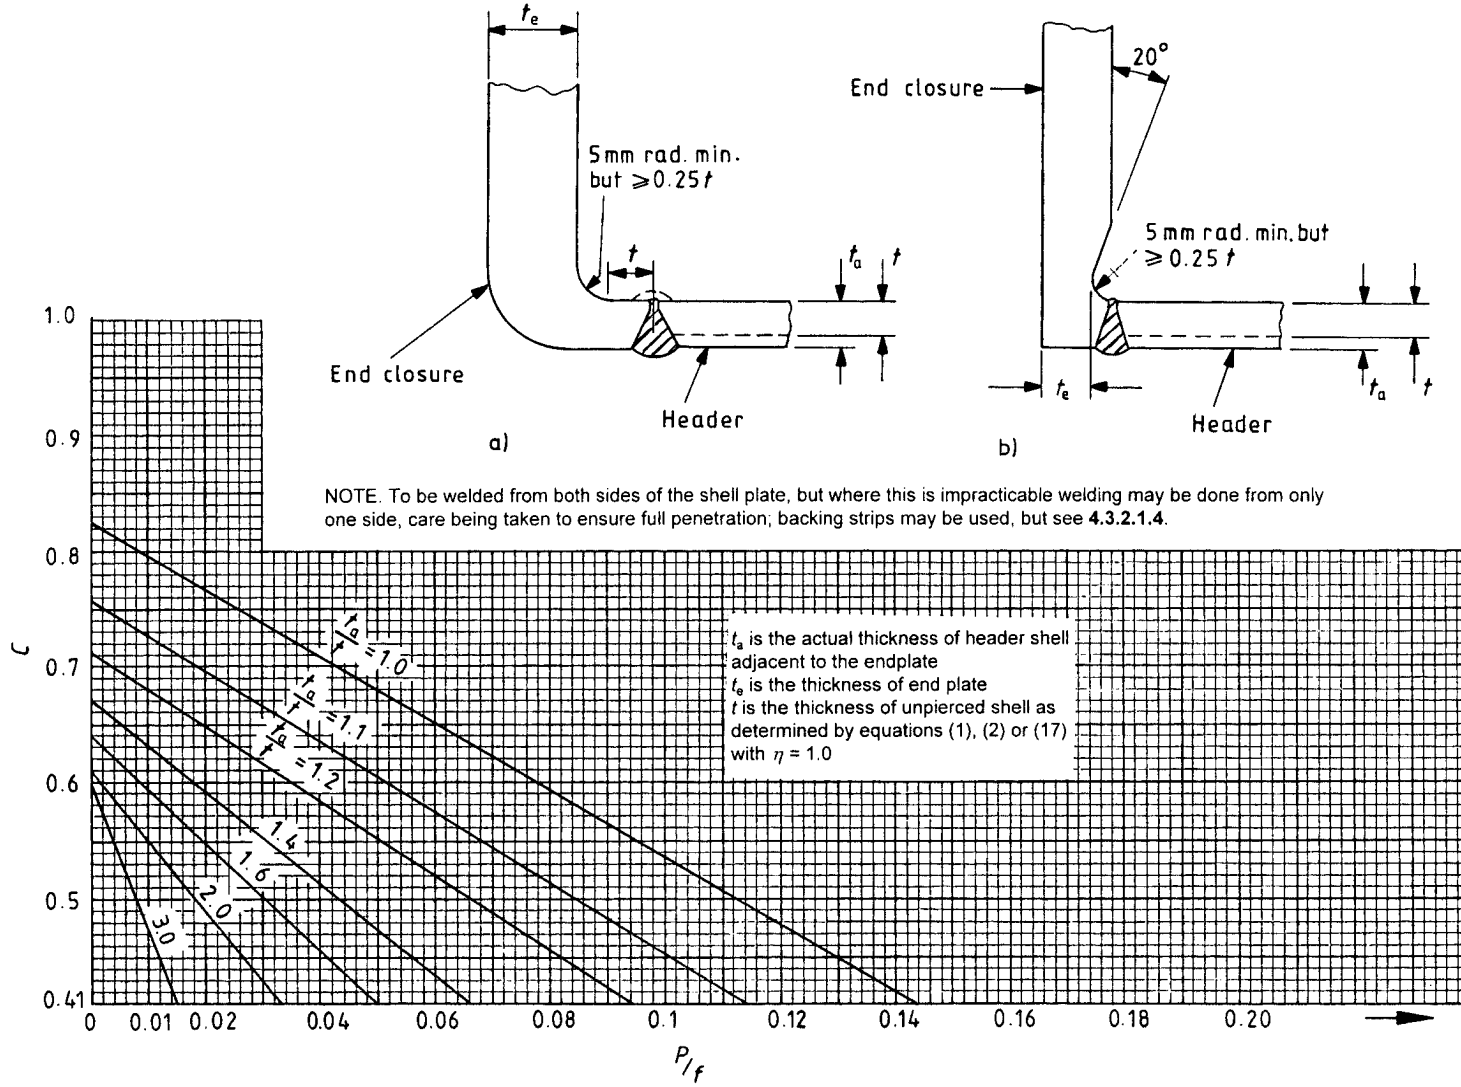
Factor C for header ends with butt weld in shell
